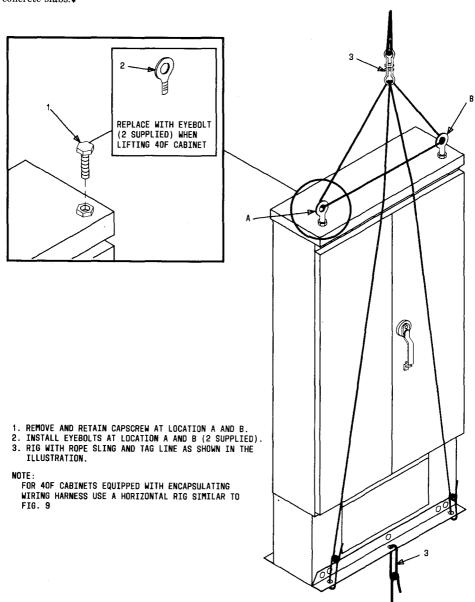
\$Lifting 40F Cabinet For Placing on Foundation€
